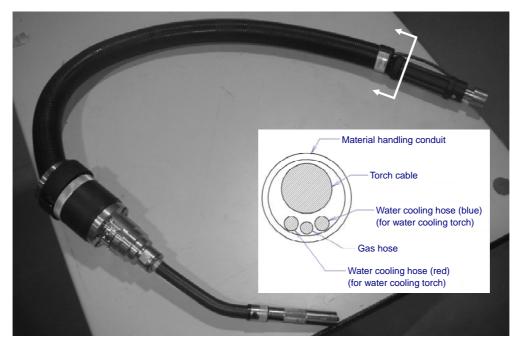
(a) Torch appearance (Section view is seen from the arrow direction)
